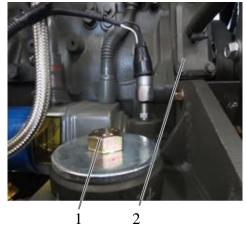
1 Connecting bolt of engine support 2 Engine
